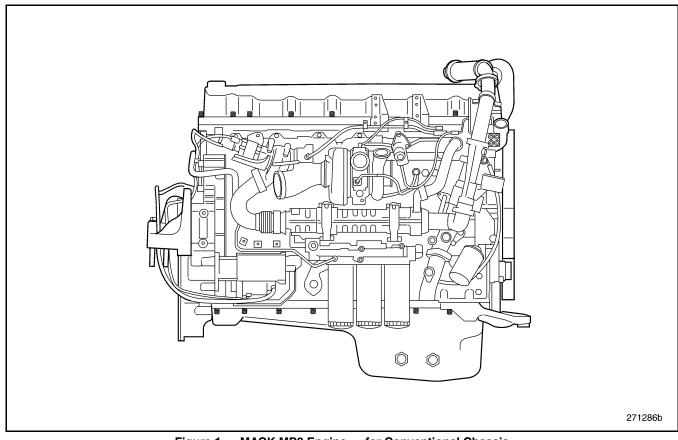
MACK MP8 Engine — for Conventional Chassis
